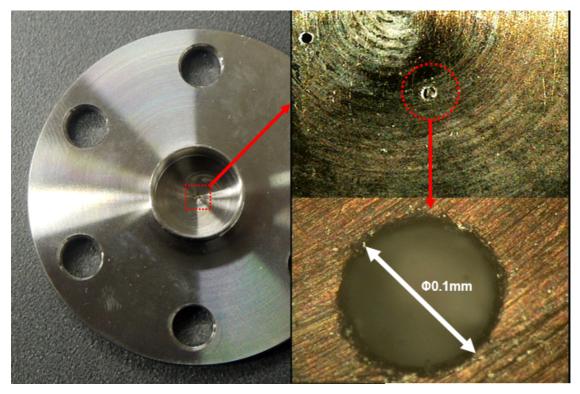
Super drill machined showerhead type injector (Dia 0.1mm * 4 holes)
